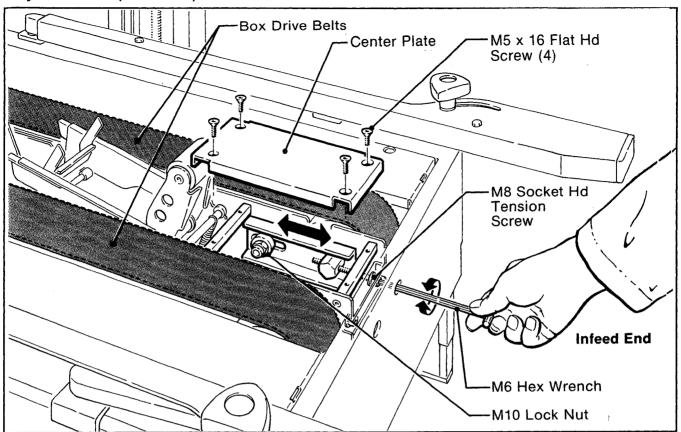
Box Drive Belt Tension Adjustment, Lower Belts (Infeed End)
